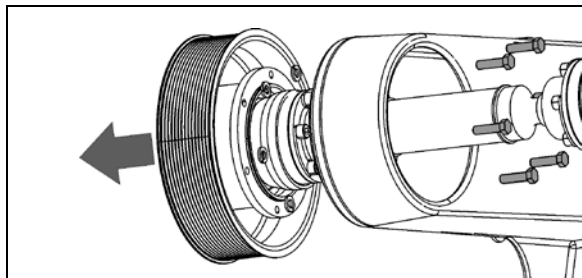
DISMOUNTING FAN DRIVE PULLEY 05123C
